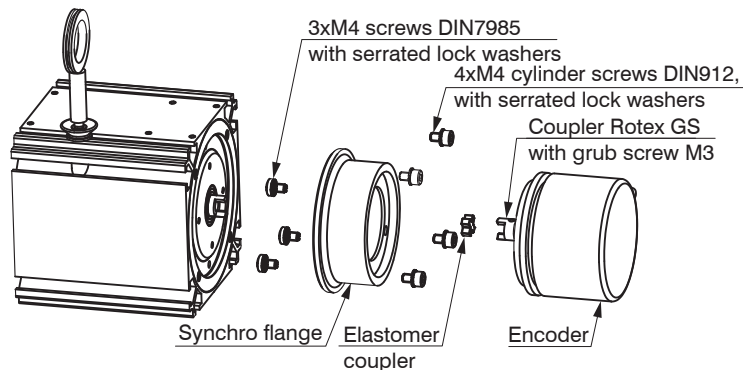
Mounting of flange and encoder, WDS-Pxxx
